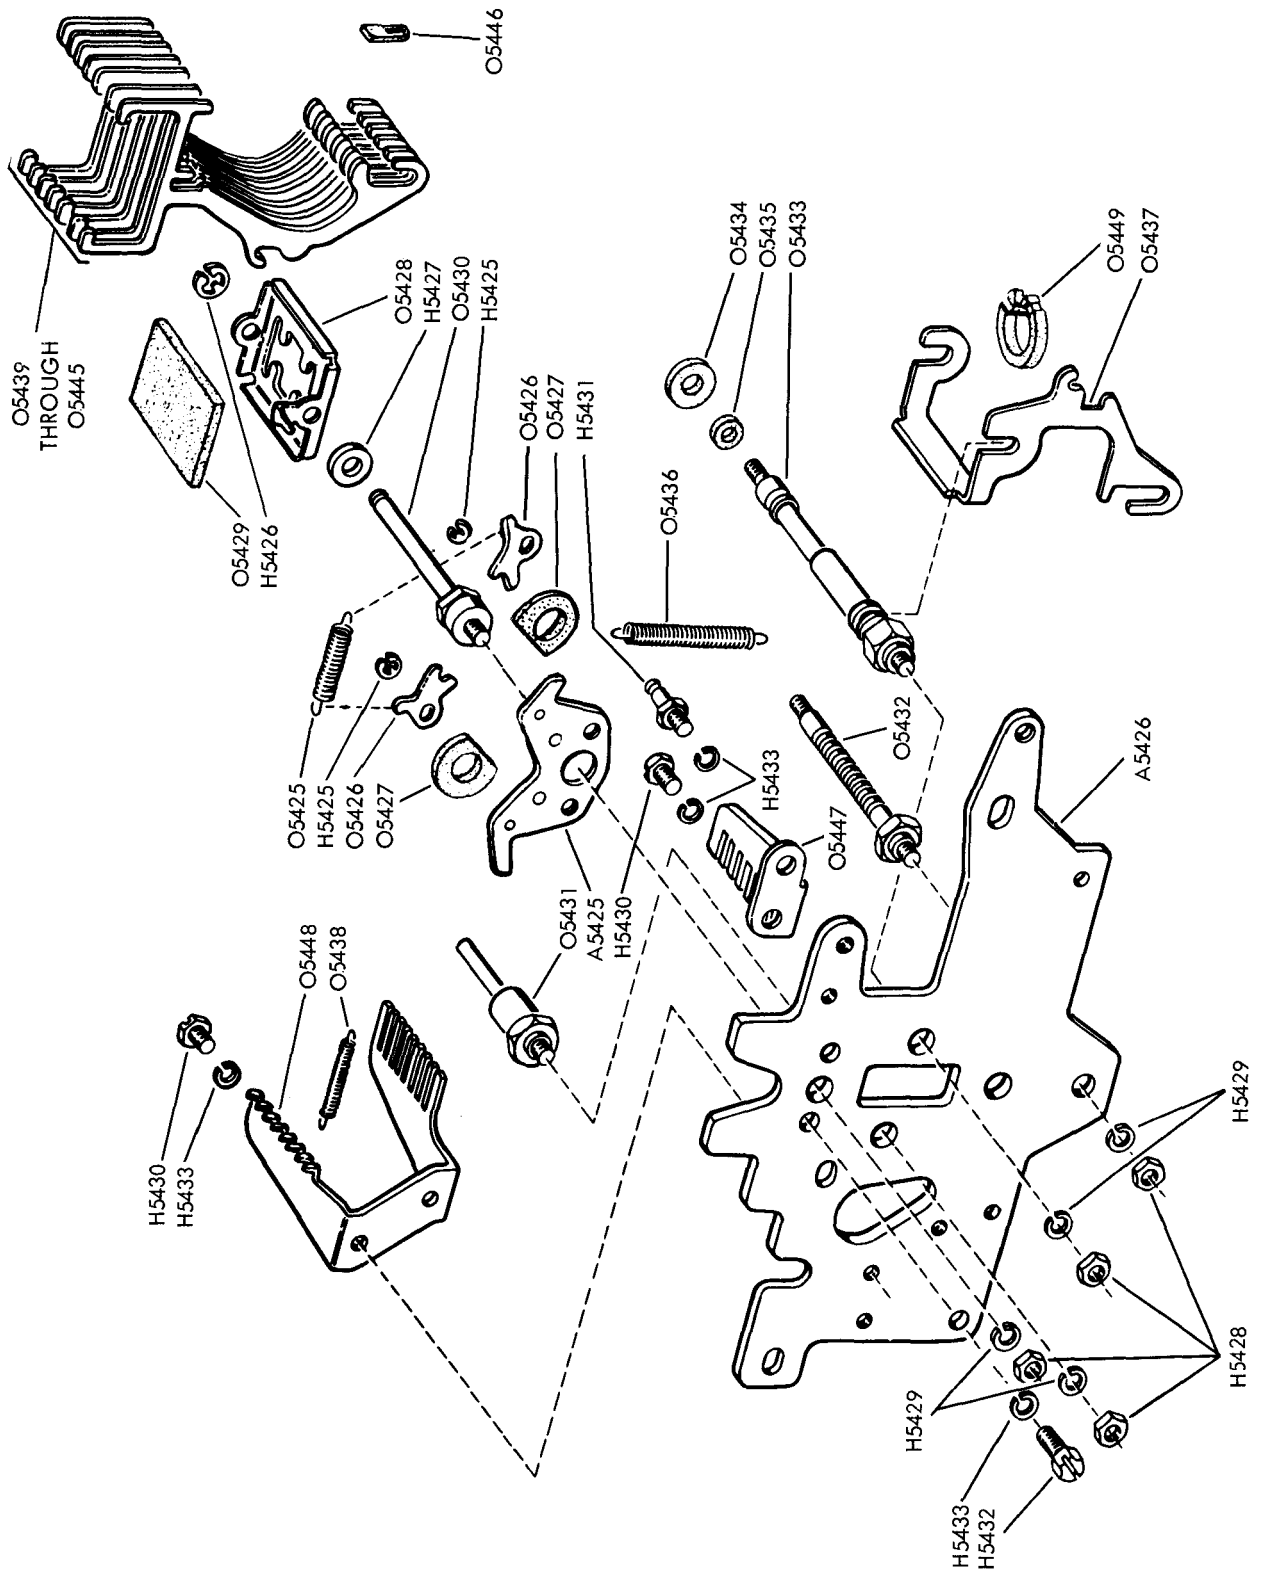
B. Keyboard MX-1114C/UG or MX-1677A/UG, Signal Generator Front Plate Mechanism
